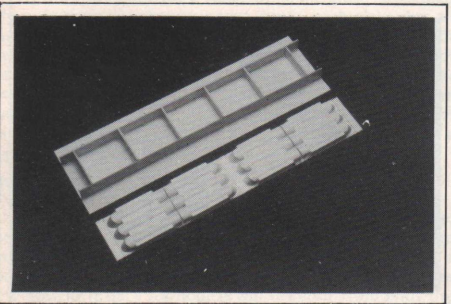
Bottom section showing internal bracing and top plastic casting.
